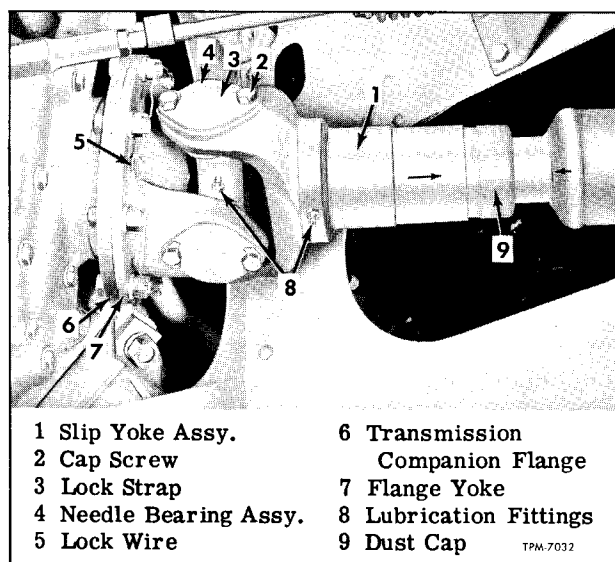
Propeller Shaft Installation at Transmission (SDH and TDH Models)
